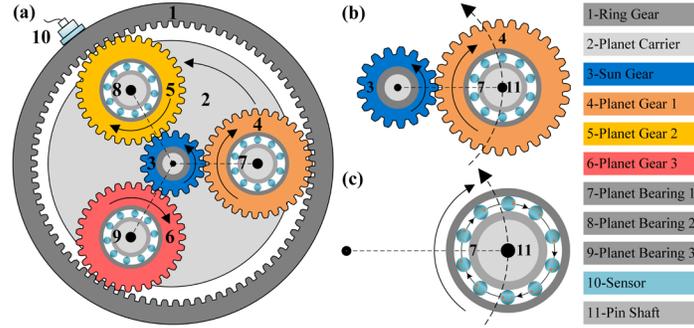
Physical Configurations of Planetary Gearbox and Kinematic Mechanism of Planet Bearings.
